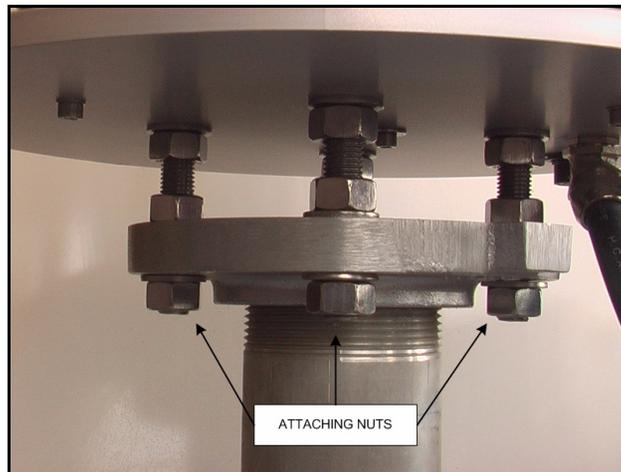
A.5.3.4.1-1. Measurement System Assembly Connections
